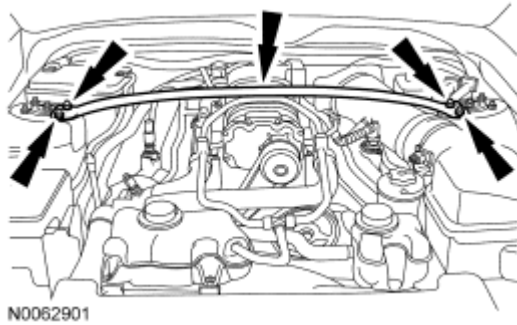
Locating Strut Tower Cross Brace & Nuts
